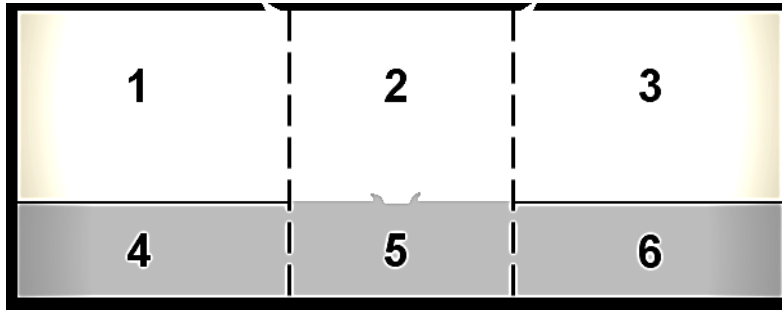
Schematic of sectioned regions of AA6061-T6/wrought steel weld specimen.
